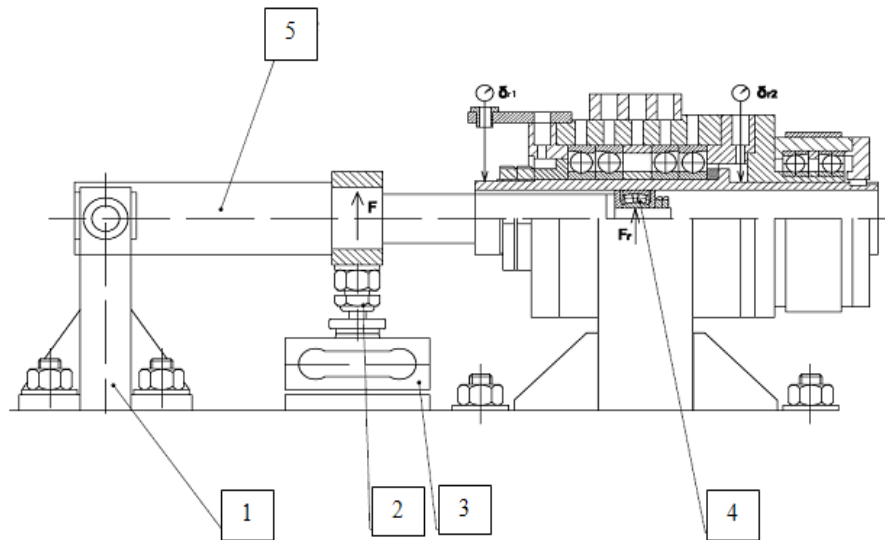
Cut of experimental stand, 1- holder, 2- to retighten screw, 3- dynamometer, 4- force bearing, 5- force arm
